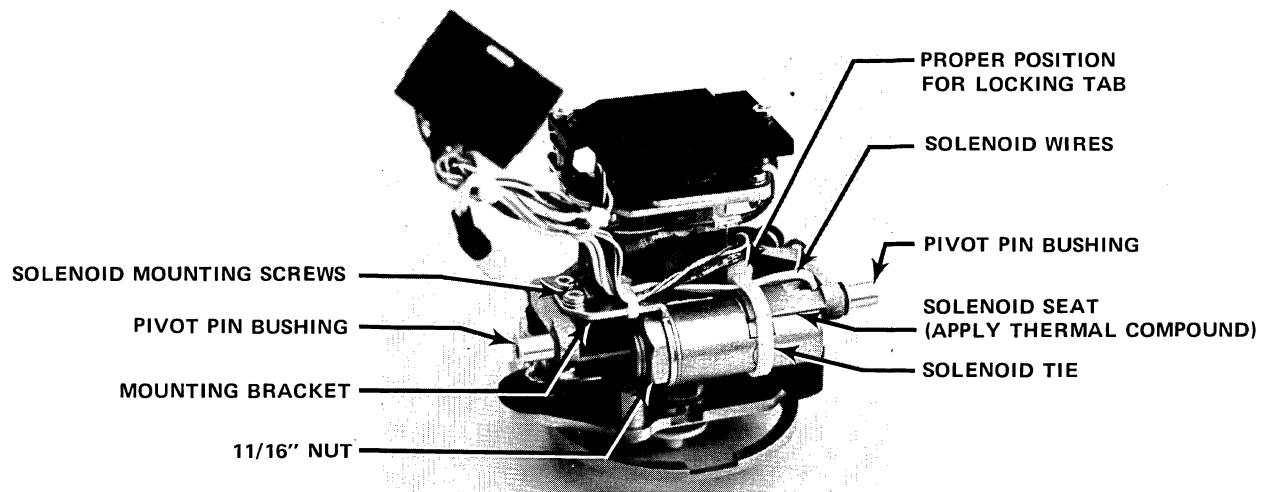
ECS CARRIAGE PIVOT ASSEMBLY
